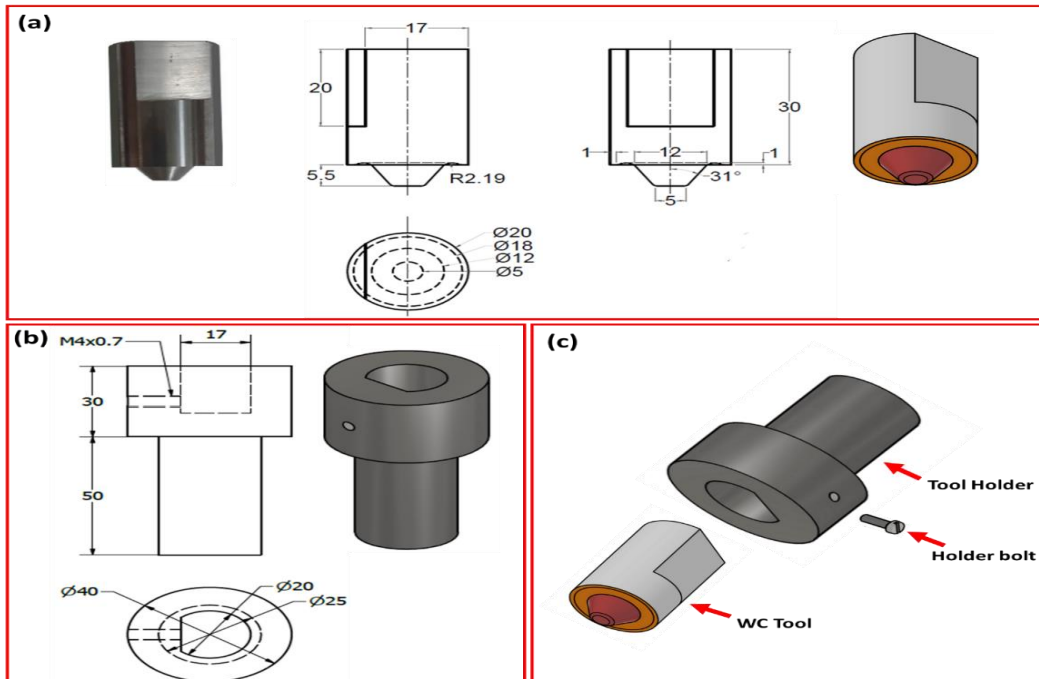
(2D) and (3D) drawings of (a) the applied WC tools and (b) the WC tool holder, and (c) exploded drawing of the applied WC tool.
